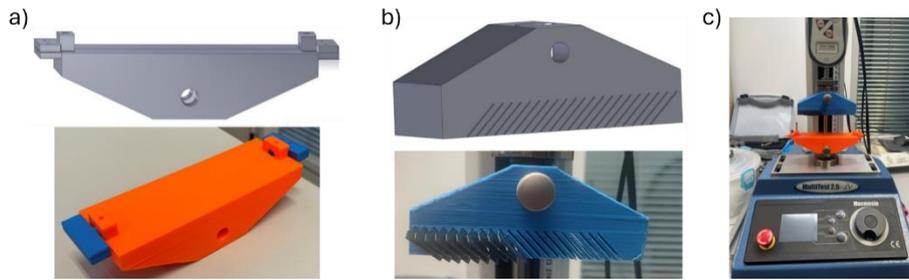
a) Tool of fixation and rotation of the PCL fibres. b) Cutting tool. c) Multitest 2.5-dV machine equipped with the fixation, rotation, and cutting tools.
